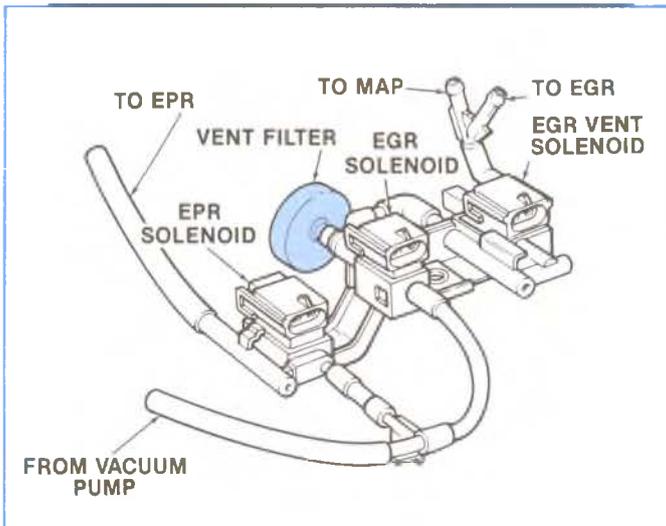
, EGR, EPR, Vent Solenoid Assembly.
